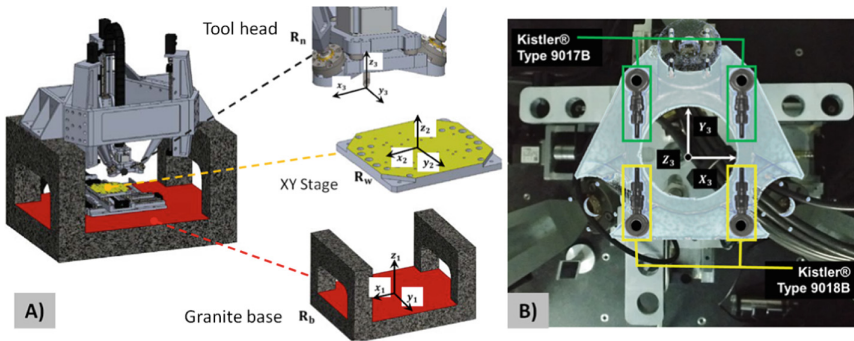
A) Reference systems of the machine tool. B) Arrangement of piezoelectric sensors in the tool head.
